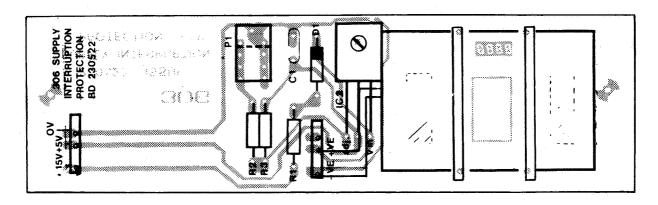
SUPPLY INTERRUPT PROTECTION, BOARD ASSEMBLY (Drawing No.AH230522, Issue 3)
